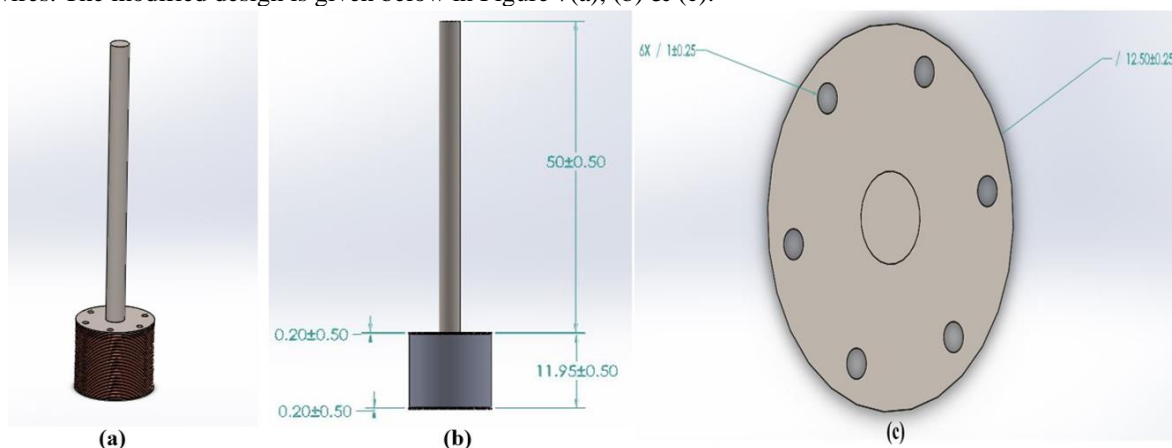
Proposed Design of MR Damper Piston (a) 3D View (b) Front View, (c) Top view
